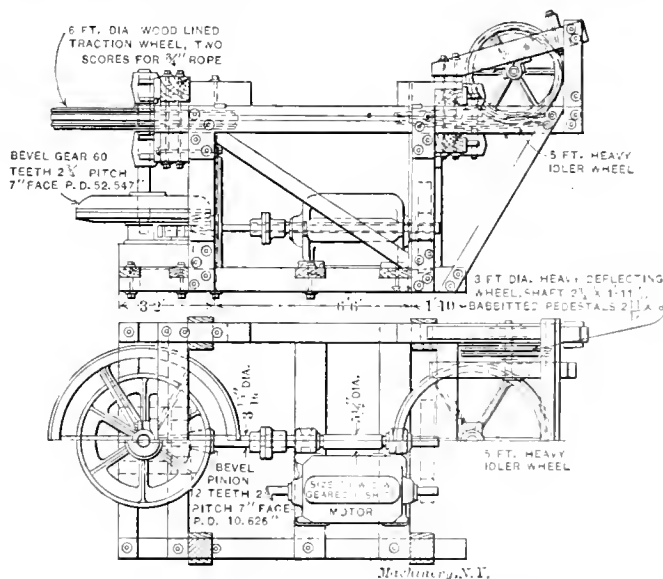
Elevation and Plan of the Cable Hauling Machinery.
